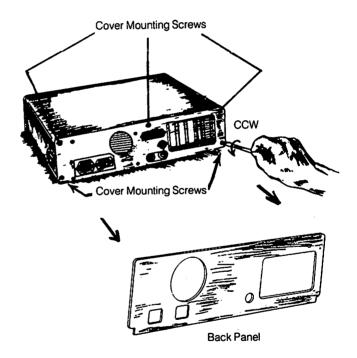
Removing the Back Panel and Location of Cover Screws
